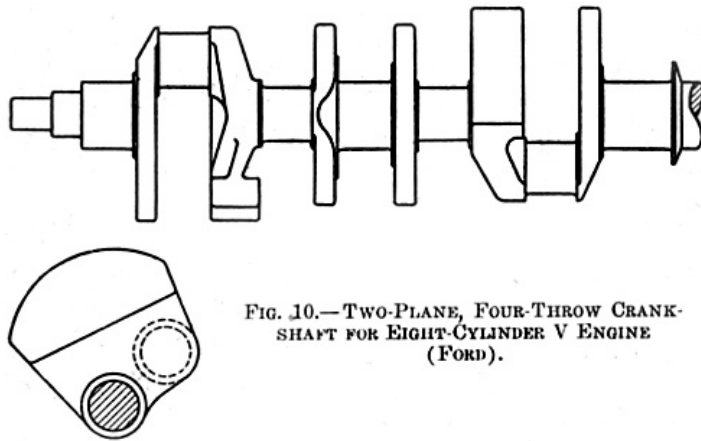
TWO-PLANE, FOUR-THROW CRANK-SHAFT FOR EIGHT-CYLINDER V ENGINE (FORD).
